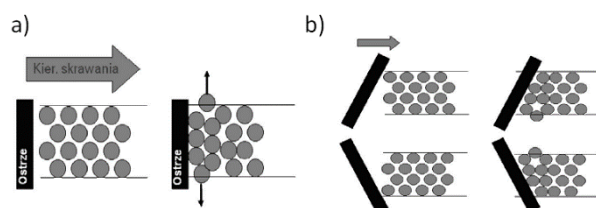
Workpiece damage on the top surface of element during milling process
